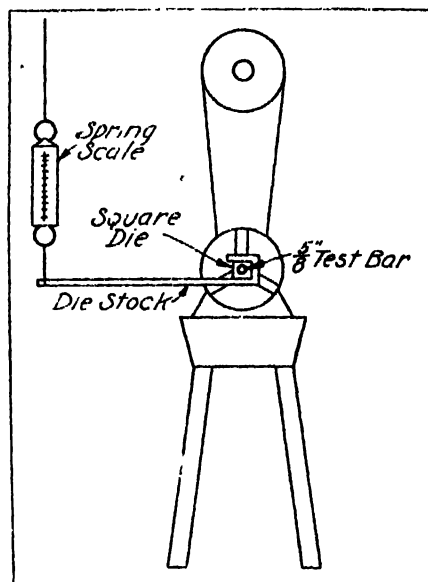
END VIEW OF MACHINABILITY TESTING MACHINE
